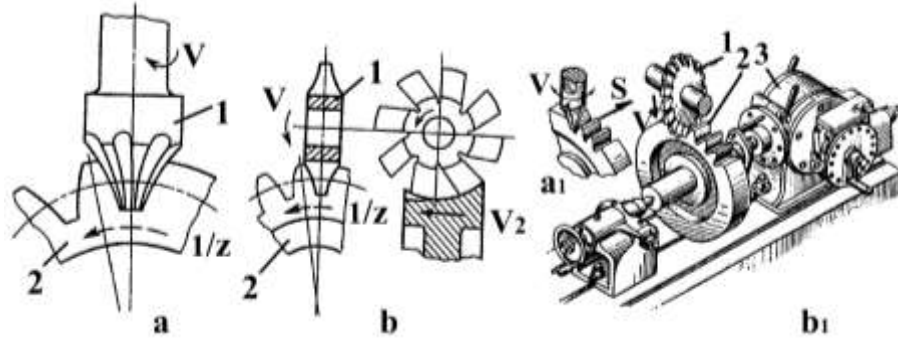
Form gear-cutting: a, b – scheme; a<sub>1</sub>, b<sub>1</sub> – drawing; 1 – cutting tool; 2 – billet; 3 – device for periodical turn of the billet on  $1/z$
